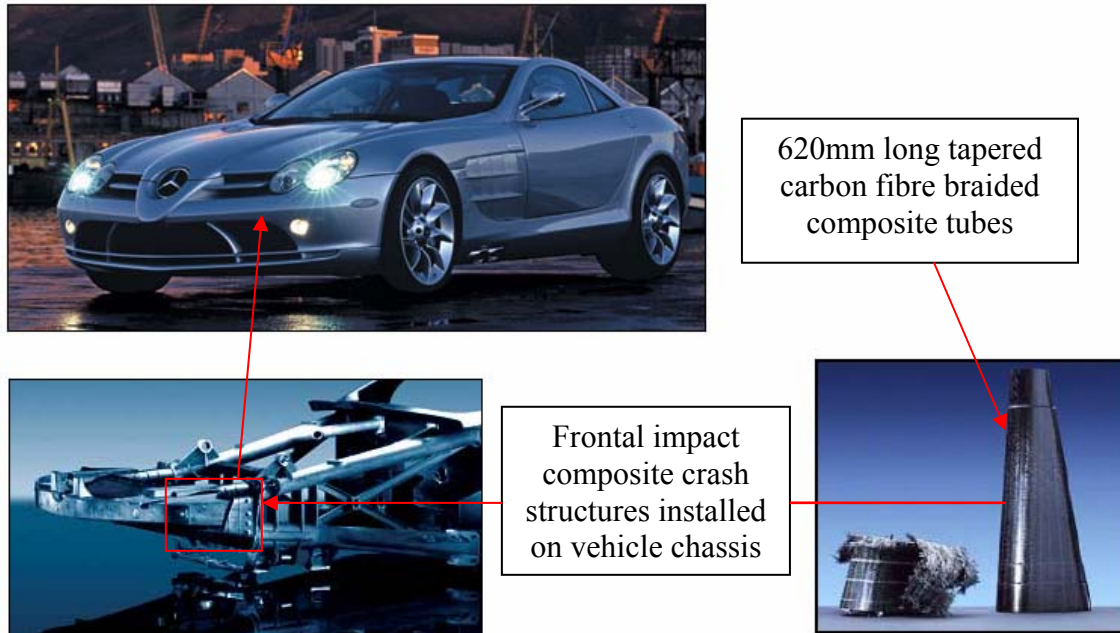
McLaren Mercedes SLR bumper tube [36]
